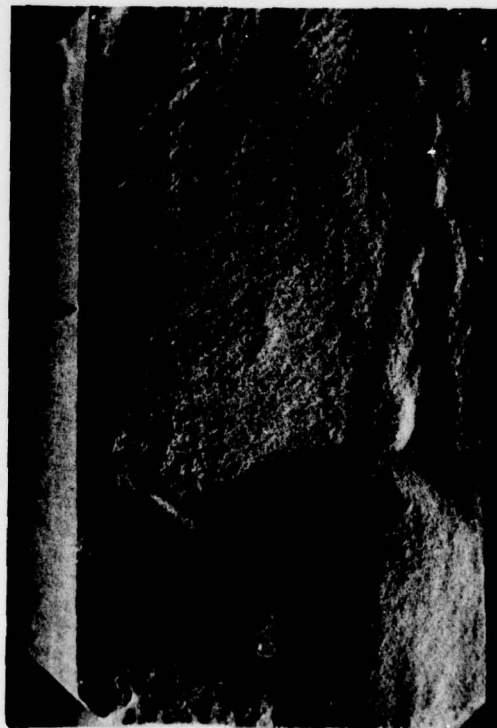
Fracture Surfaces of Ceralloy 146A HPSiC Specimen No. 1, Showing 50 kg Vicker's Indentation at Fracture Origin.
